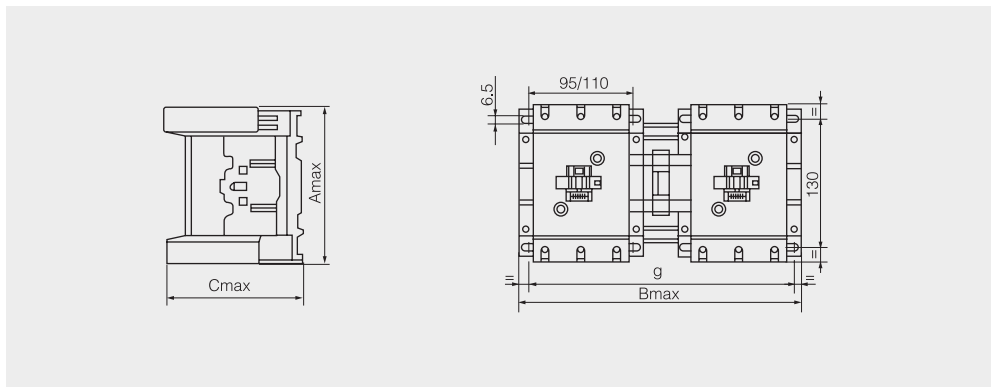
CJX2-F115N~F330N, CJX2-205N~300N(Horizontal installation)
